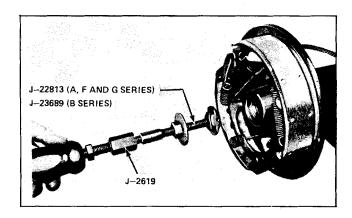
C-4 Tool for Axle Shaft Bearing and Seal Removal
